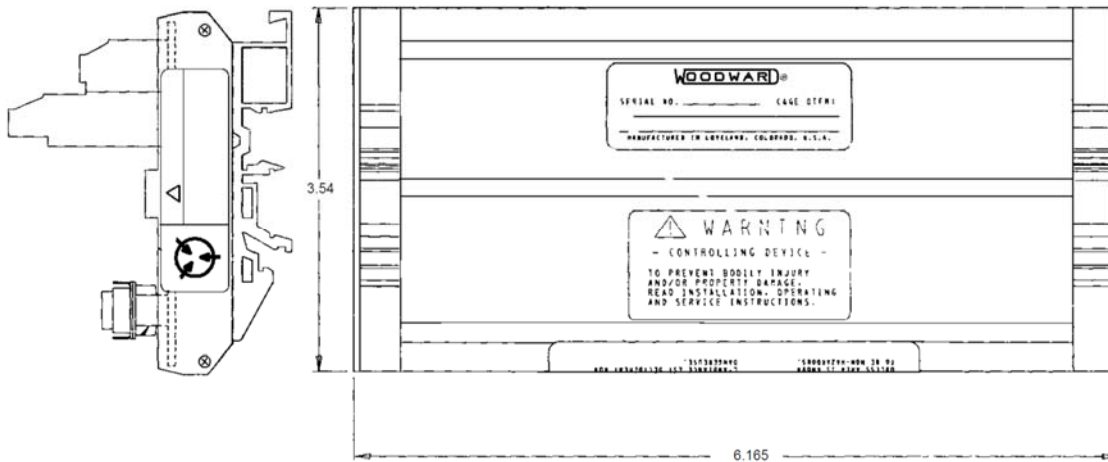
Two Channel Actuator Controller FTM Outline Dimensions
